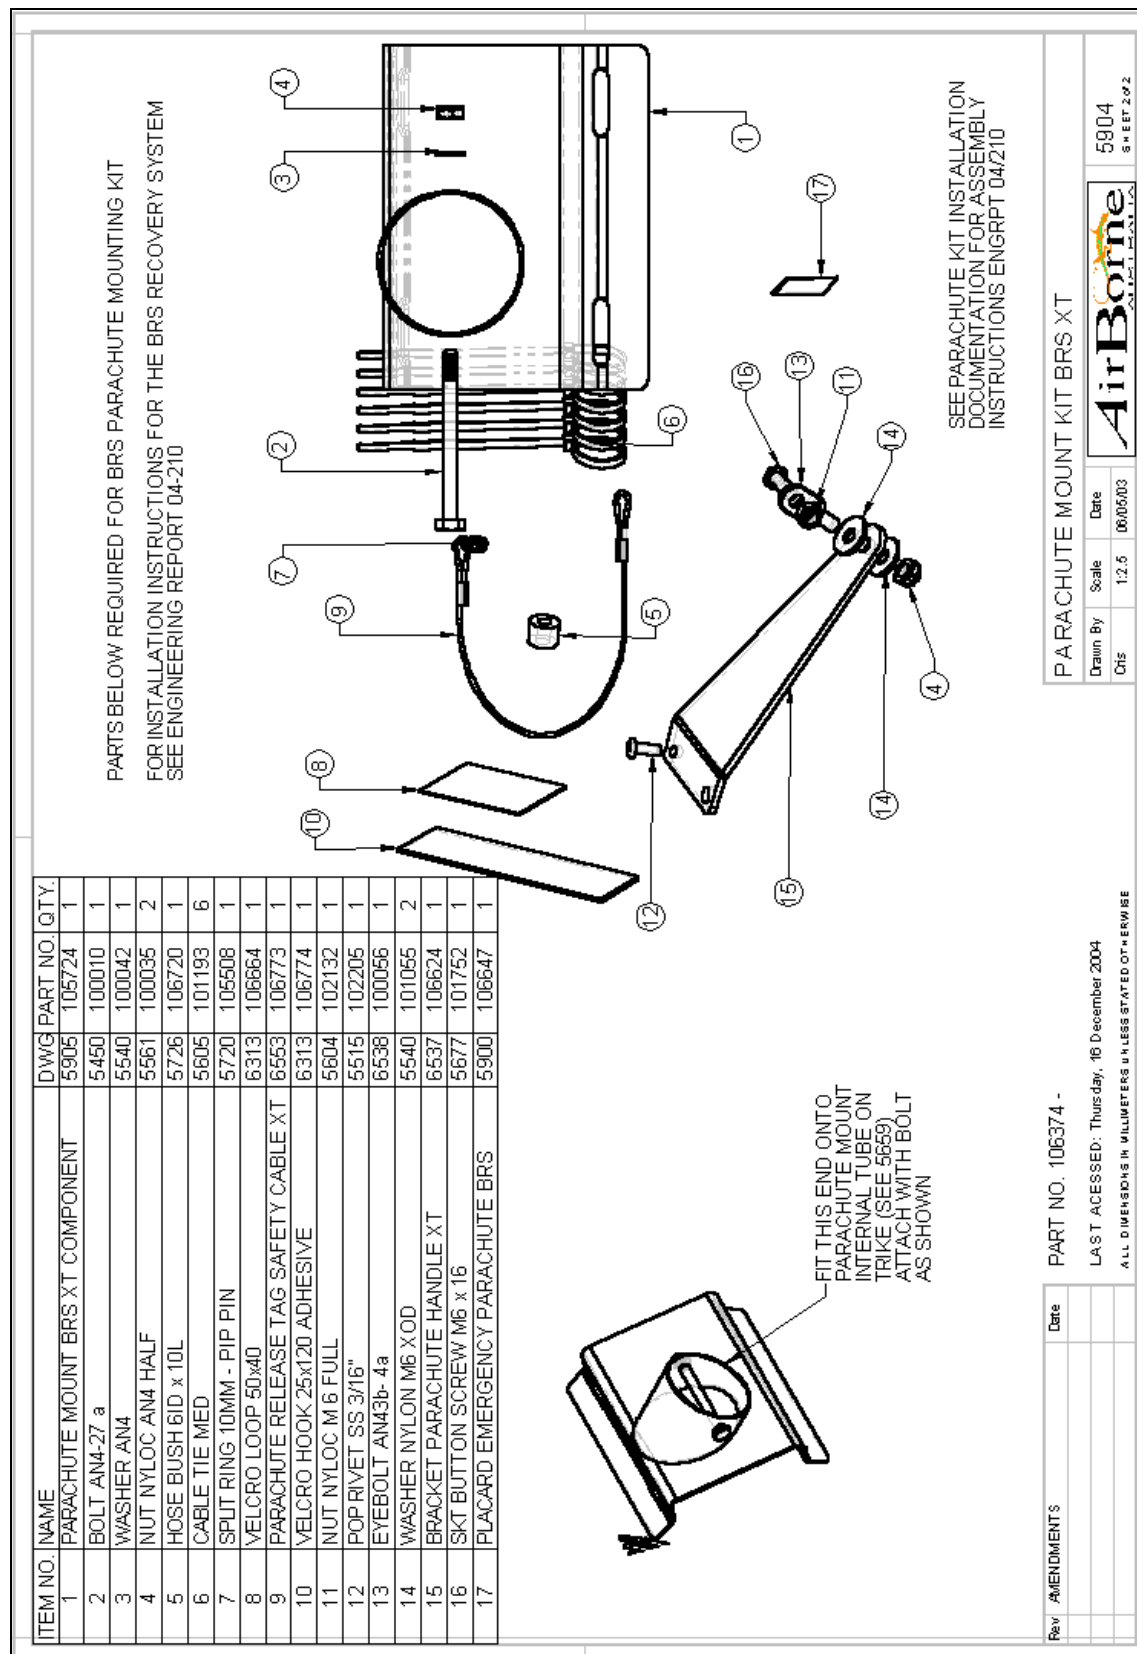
Parachute Mount Assembly. Drawing A4-5404 (Sheet 2)
